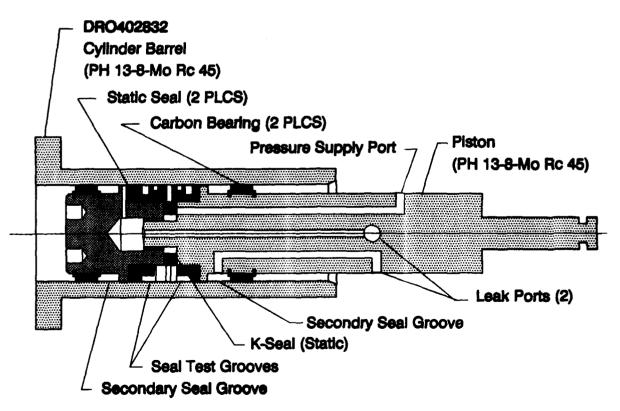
REVISED PISTON SEAL TEST MODULE
